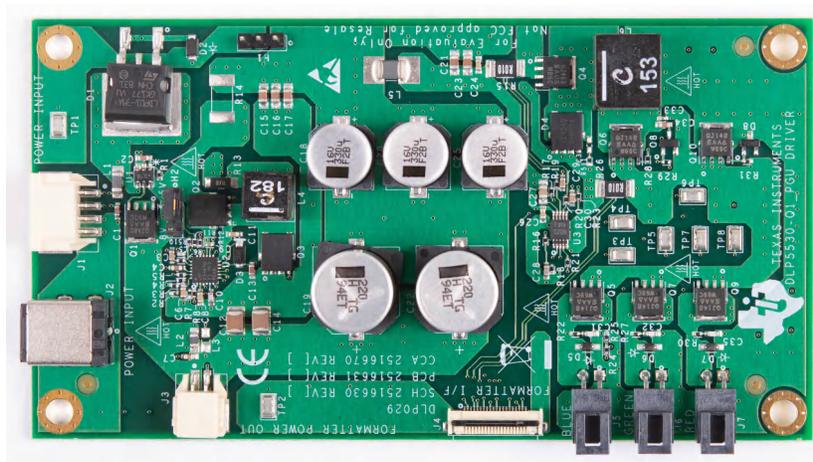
LED Driver PCB - DLP4620SQ1EVM
